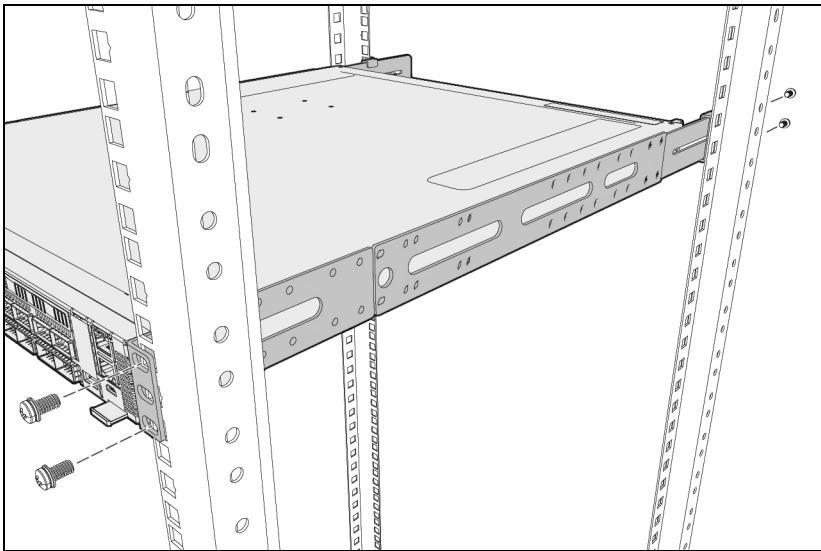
Attaching Four-post Mounting Brackets to the Switch
